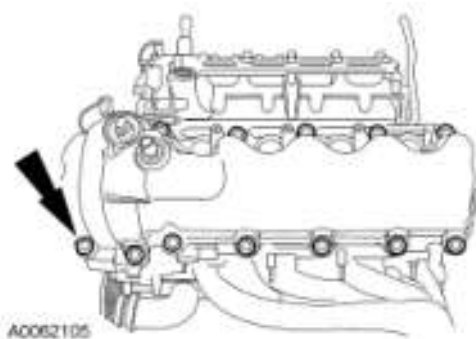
Locating Crankshaft Position (CKP) Sensor Bolt
